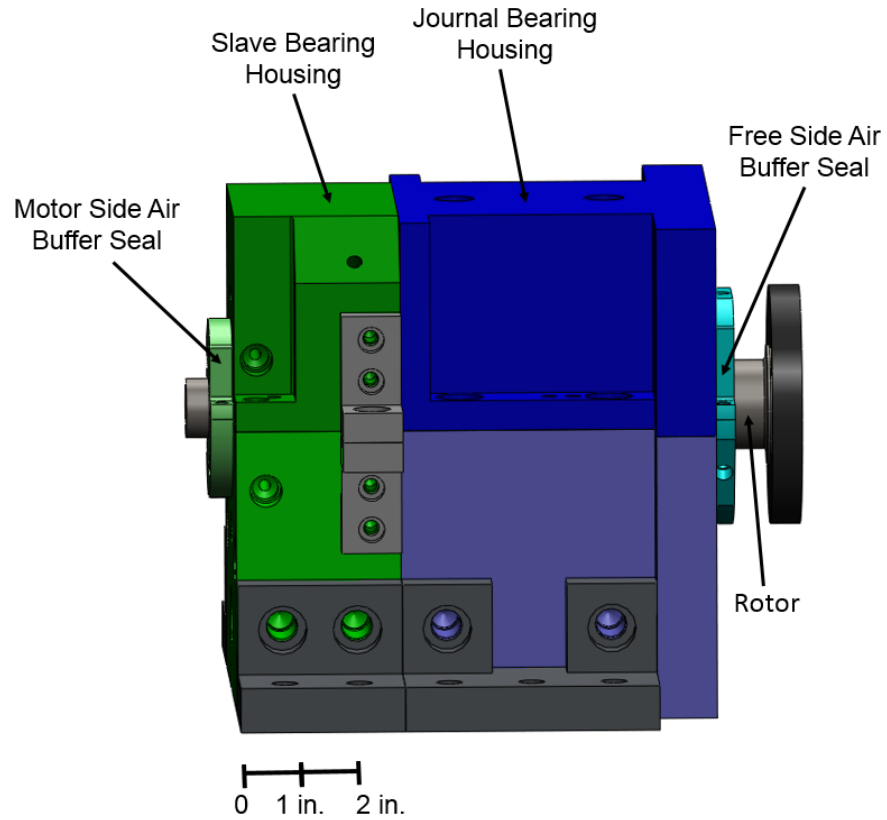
Assembly of slave thrust bearing housing and journal bearing housing with end seals installed.
